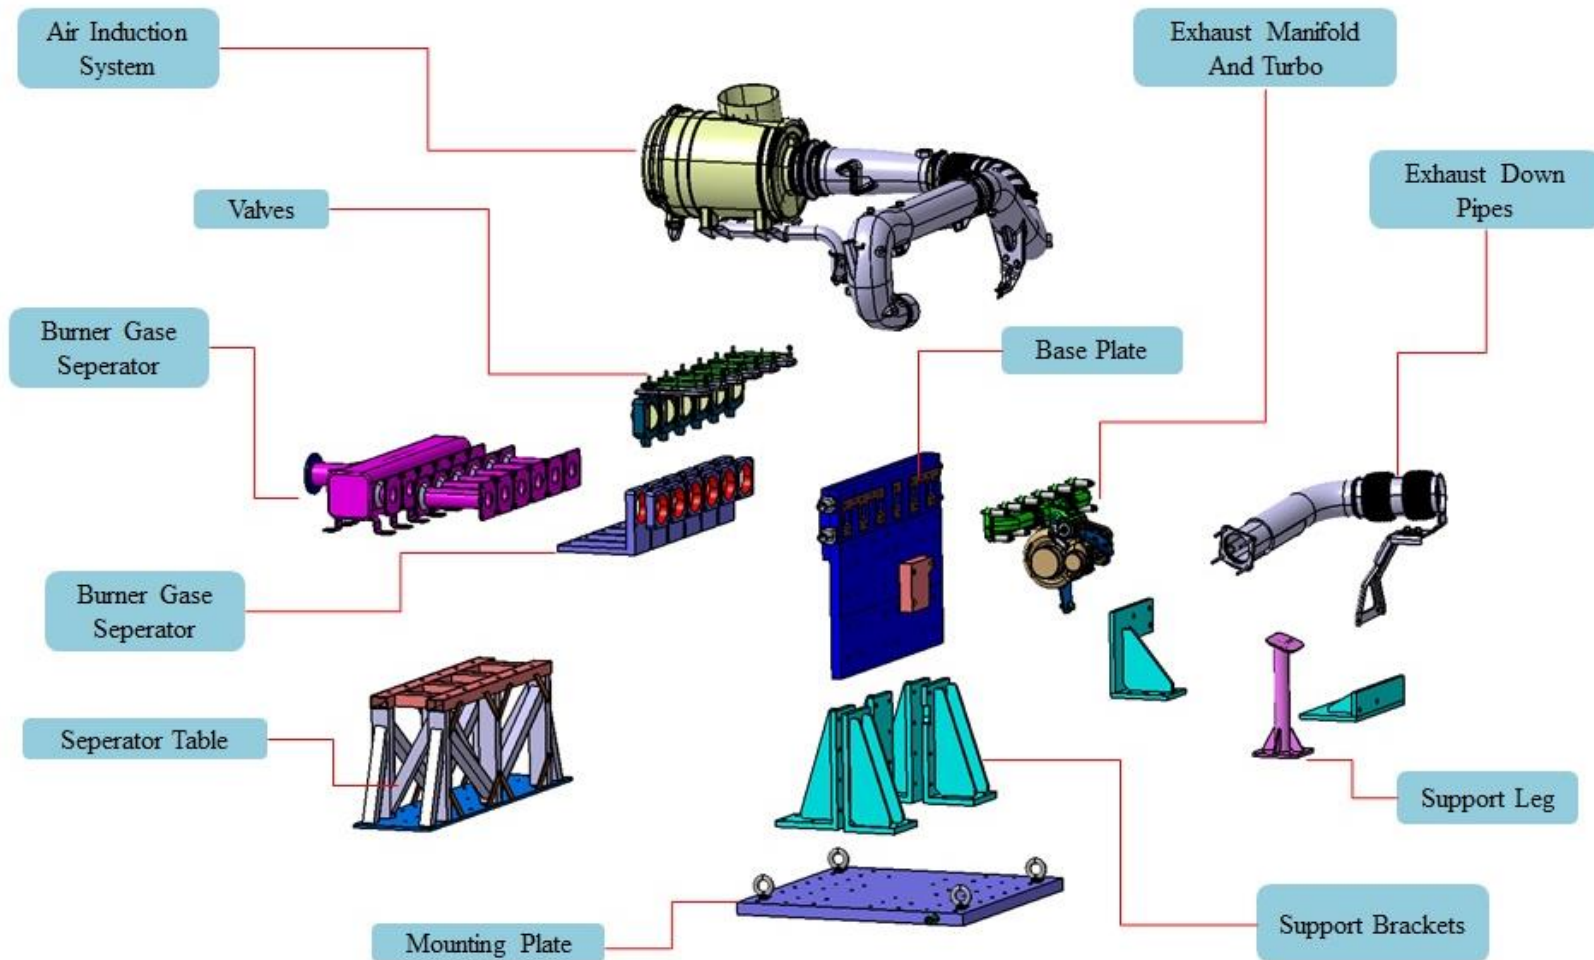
Exploded view of the TMF test rig design core parts.
